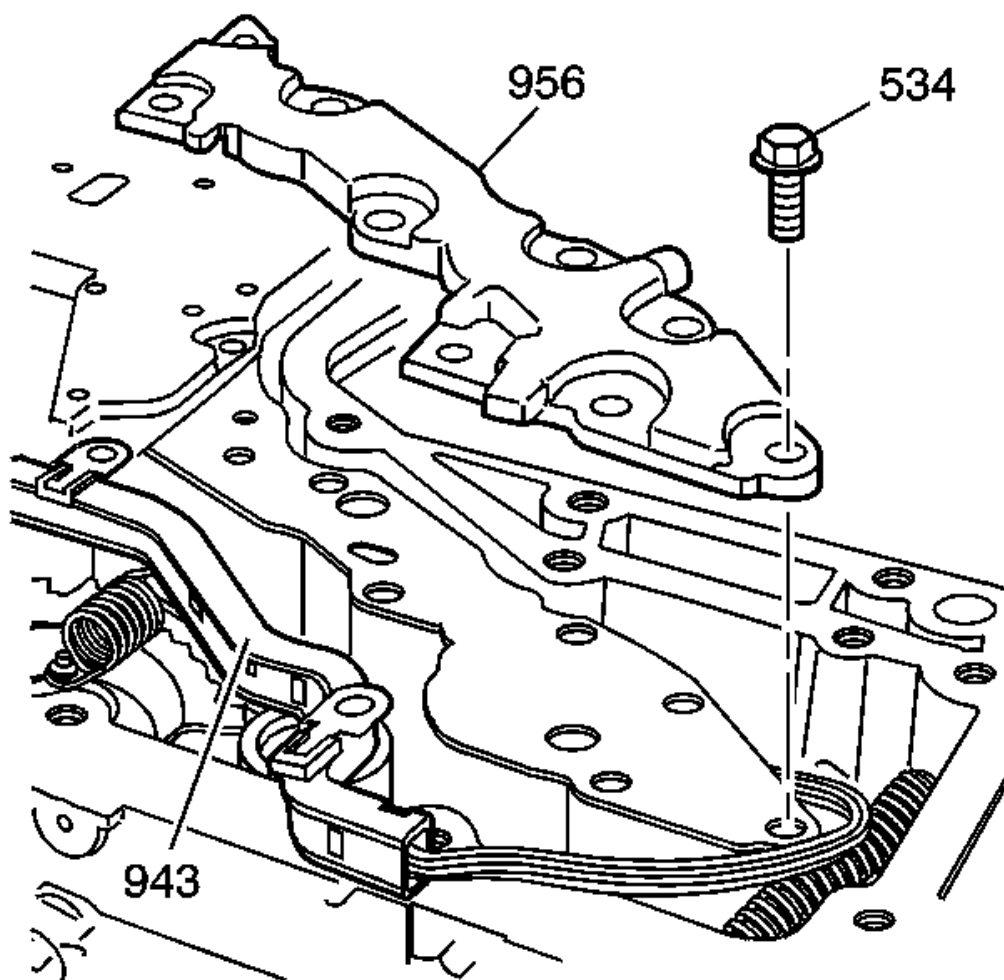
Oil Transfer Plate, Bolts & Harness Assembly
